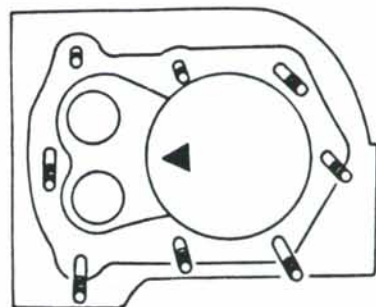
Install piston so arrow on crown points towards valves.
